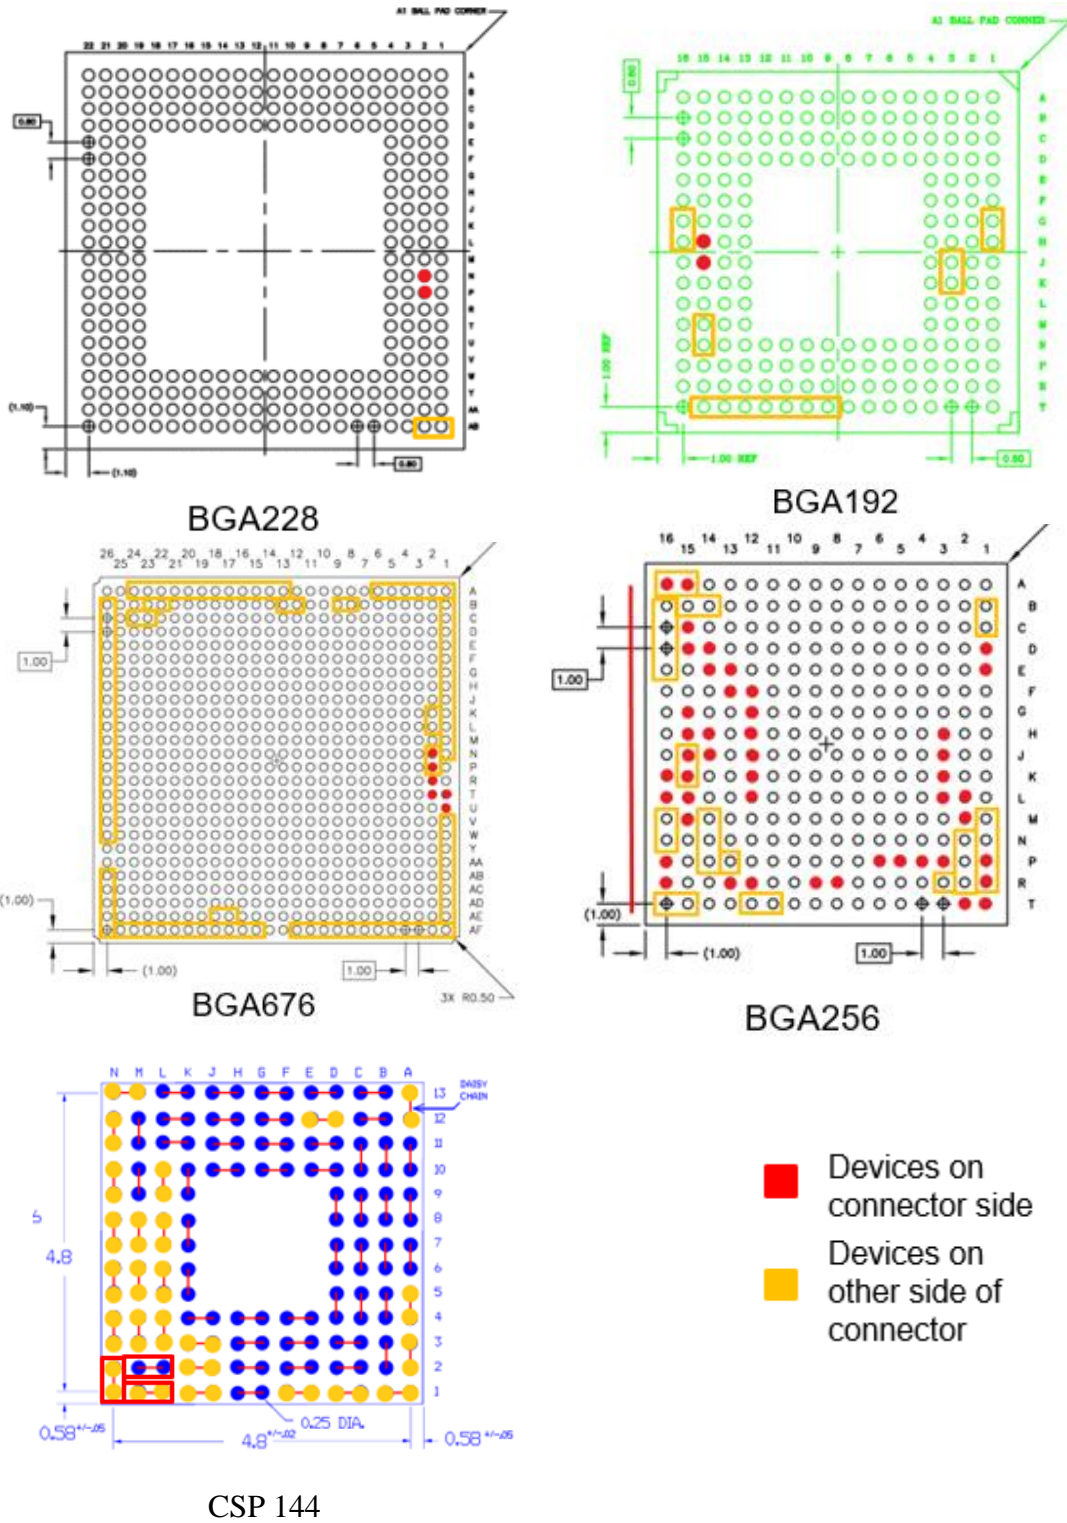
Failures in the BGA packages found through probing for the boards with UF
